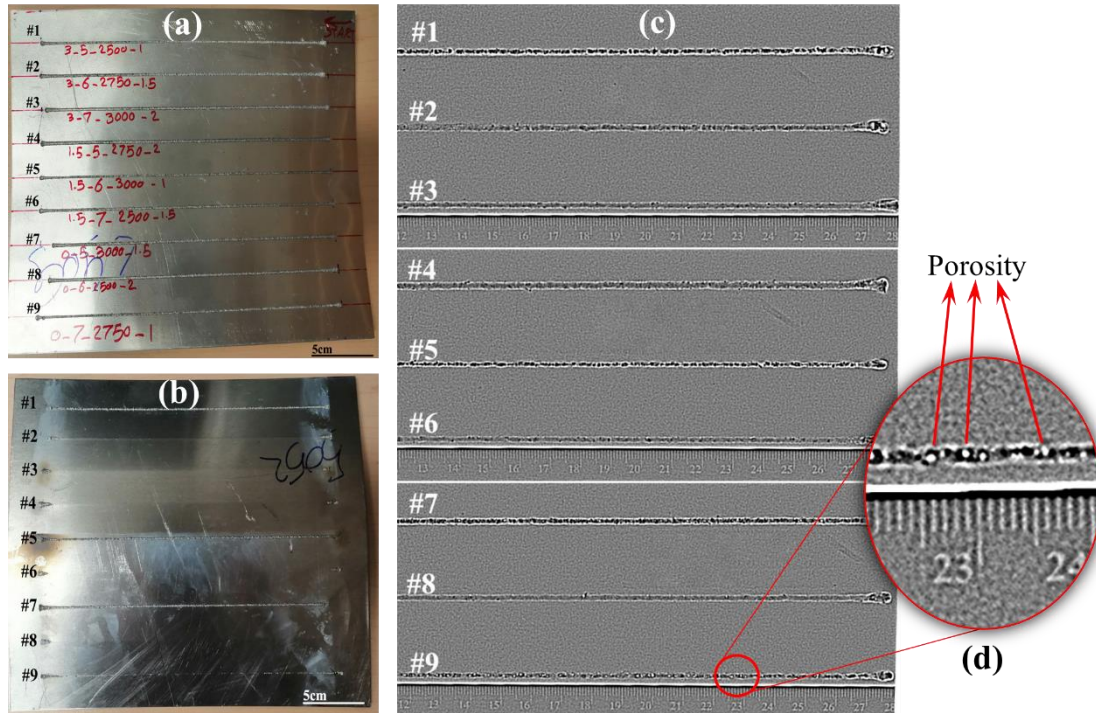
Nine weld lines for 2nd DOE from a) top sheet view, b) bottom sheet view, c) X-ray pattern, d) porosities
